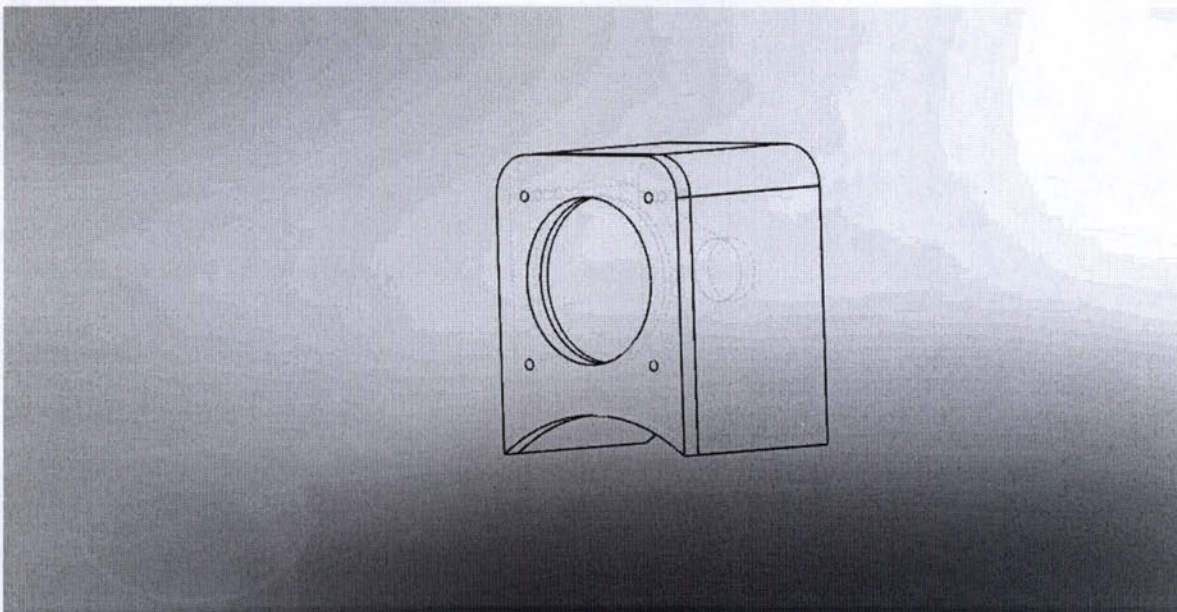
SolidWorks drawing of sensor suite chassis version 1.
